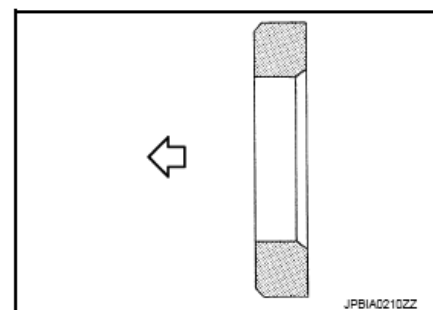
Identifying Pilot Converter Chamfer Facing Crankshaft
